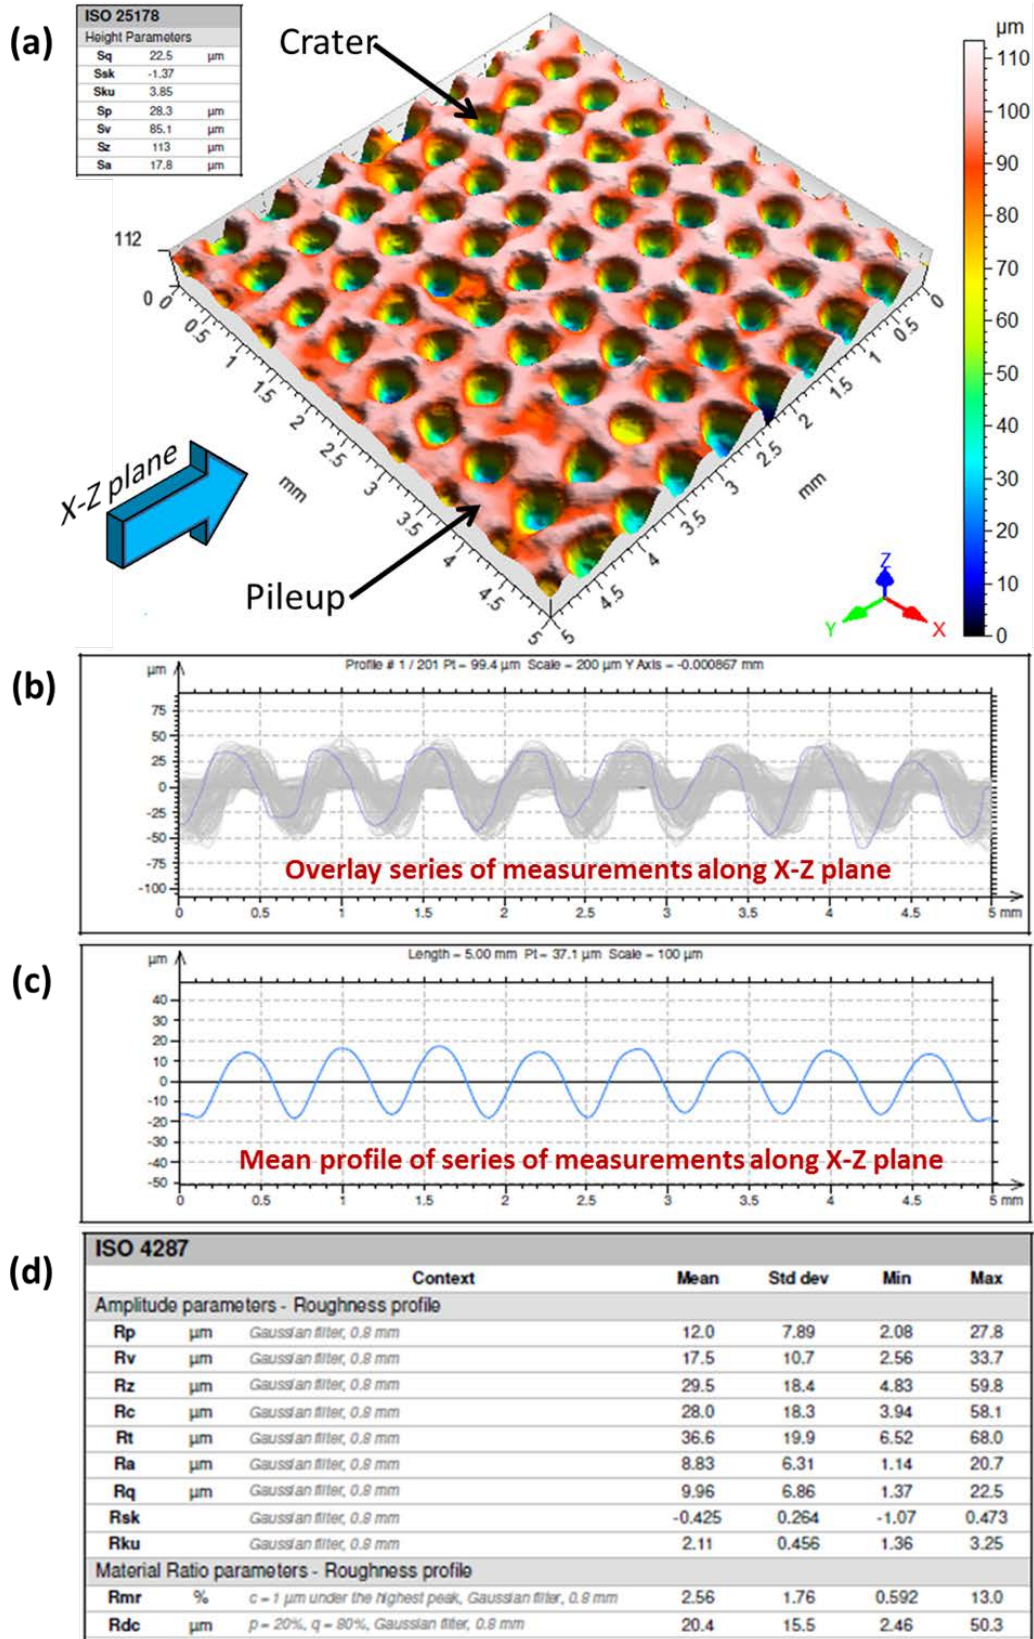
Schematic of surface profile measurements for 3D laser machining
